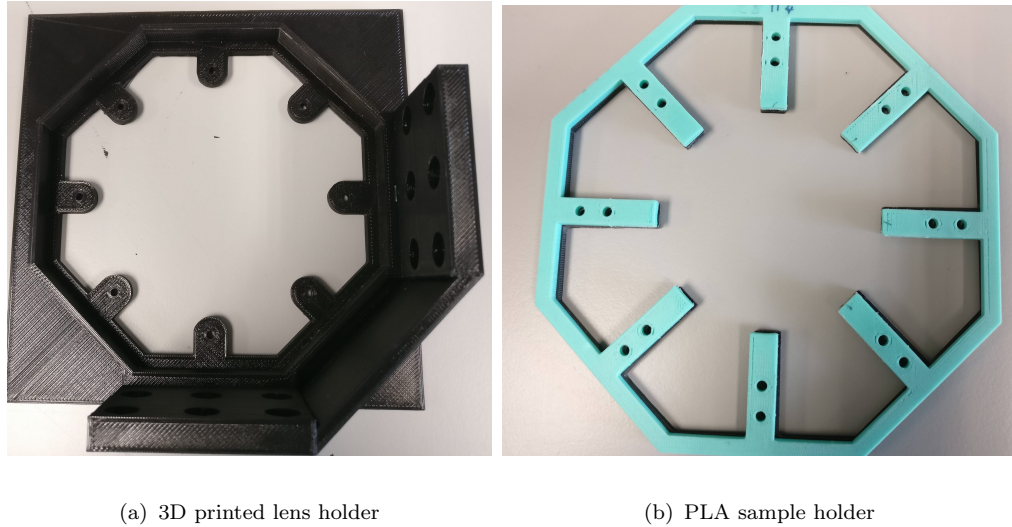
Images of the 3D printed lens holder and sample holder.
